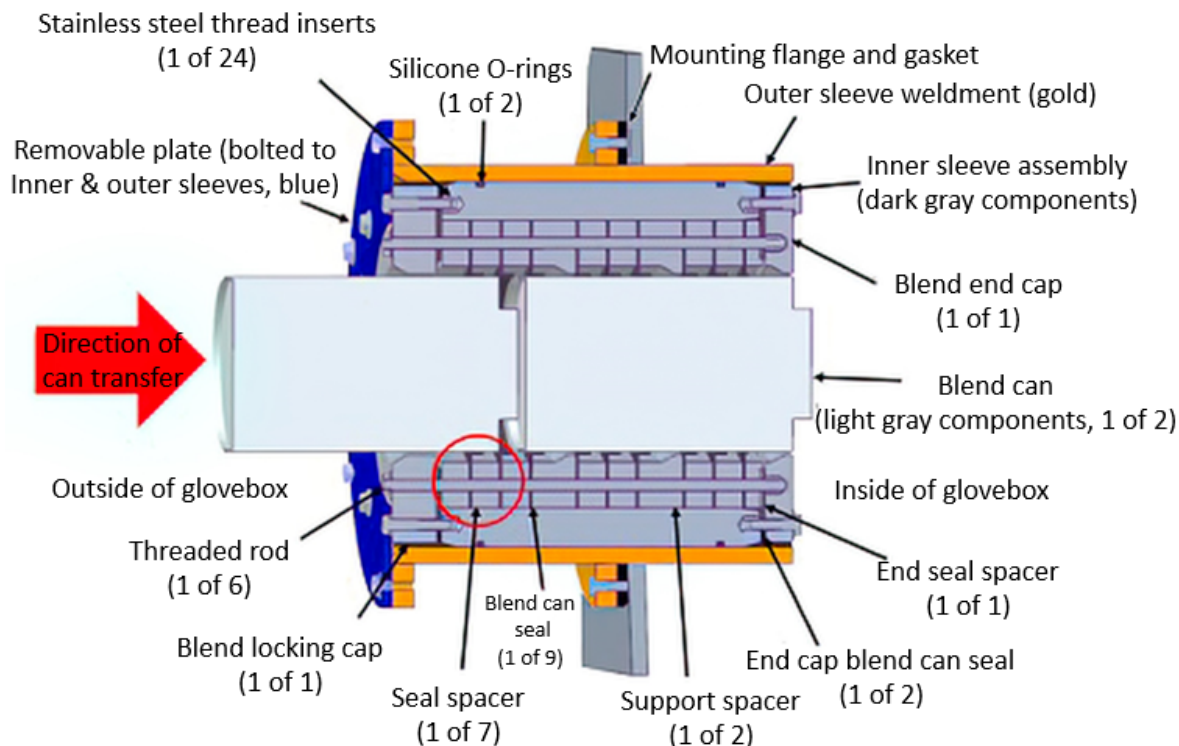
Initial Concept Cross-sectional View of Blend Can Sphincter Seal
